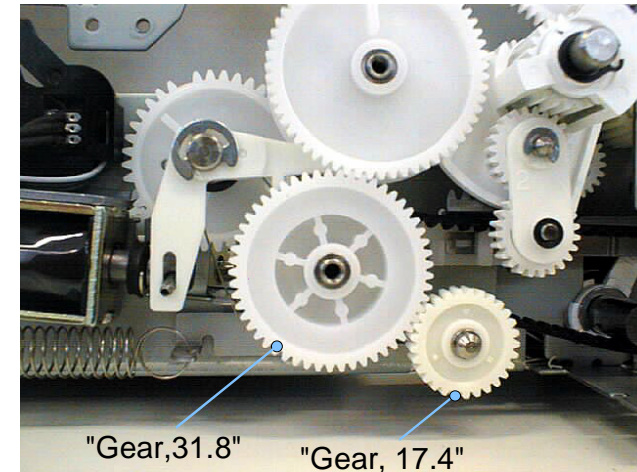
Installing "Gear, 31.8" and "Gear, 17.4"
